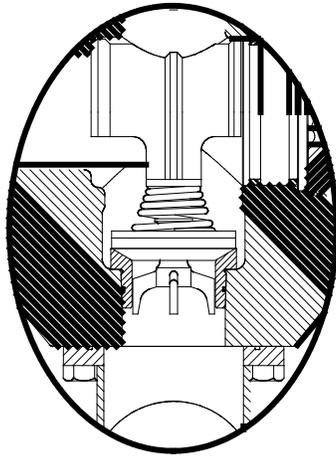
VALVE CAGE SPRING RETAINER
